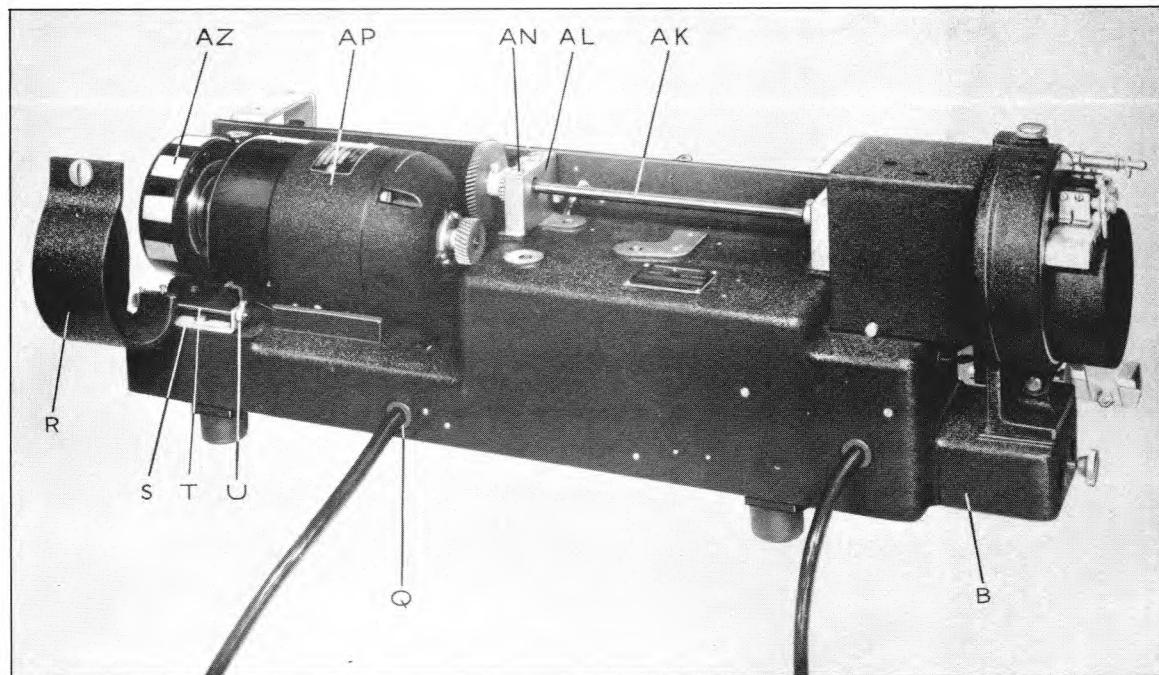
No. 67P MAIN BASE ASSEMBLY (REAR VIEW)
